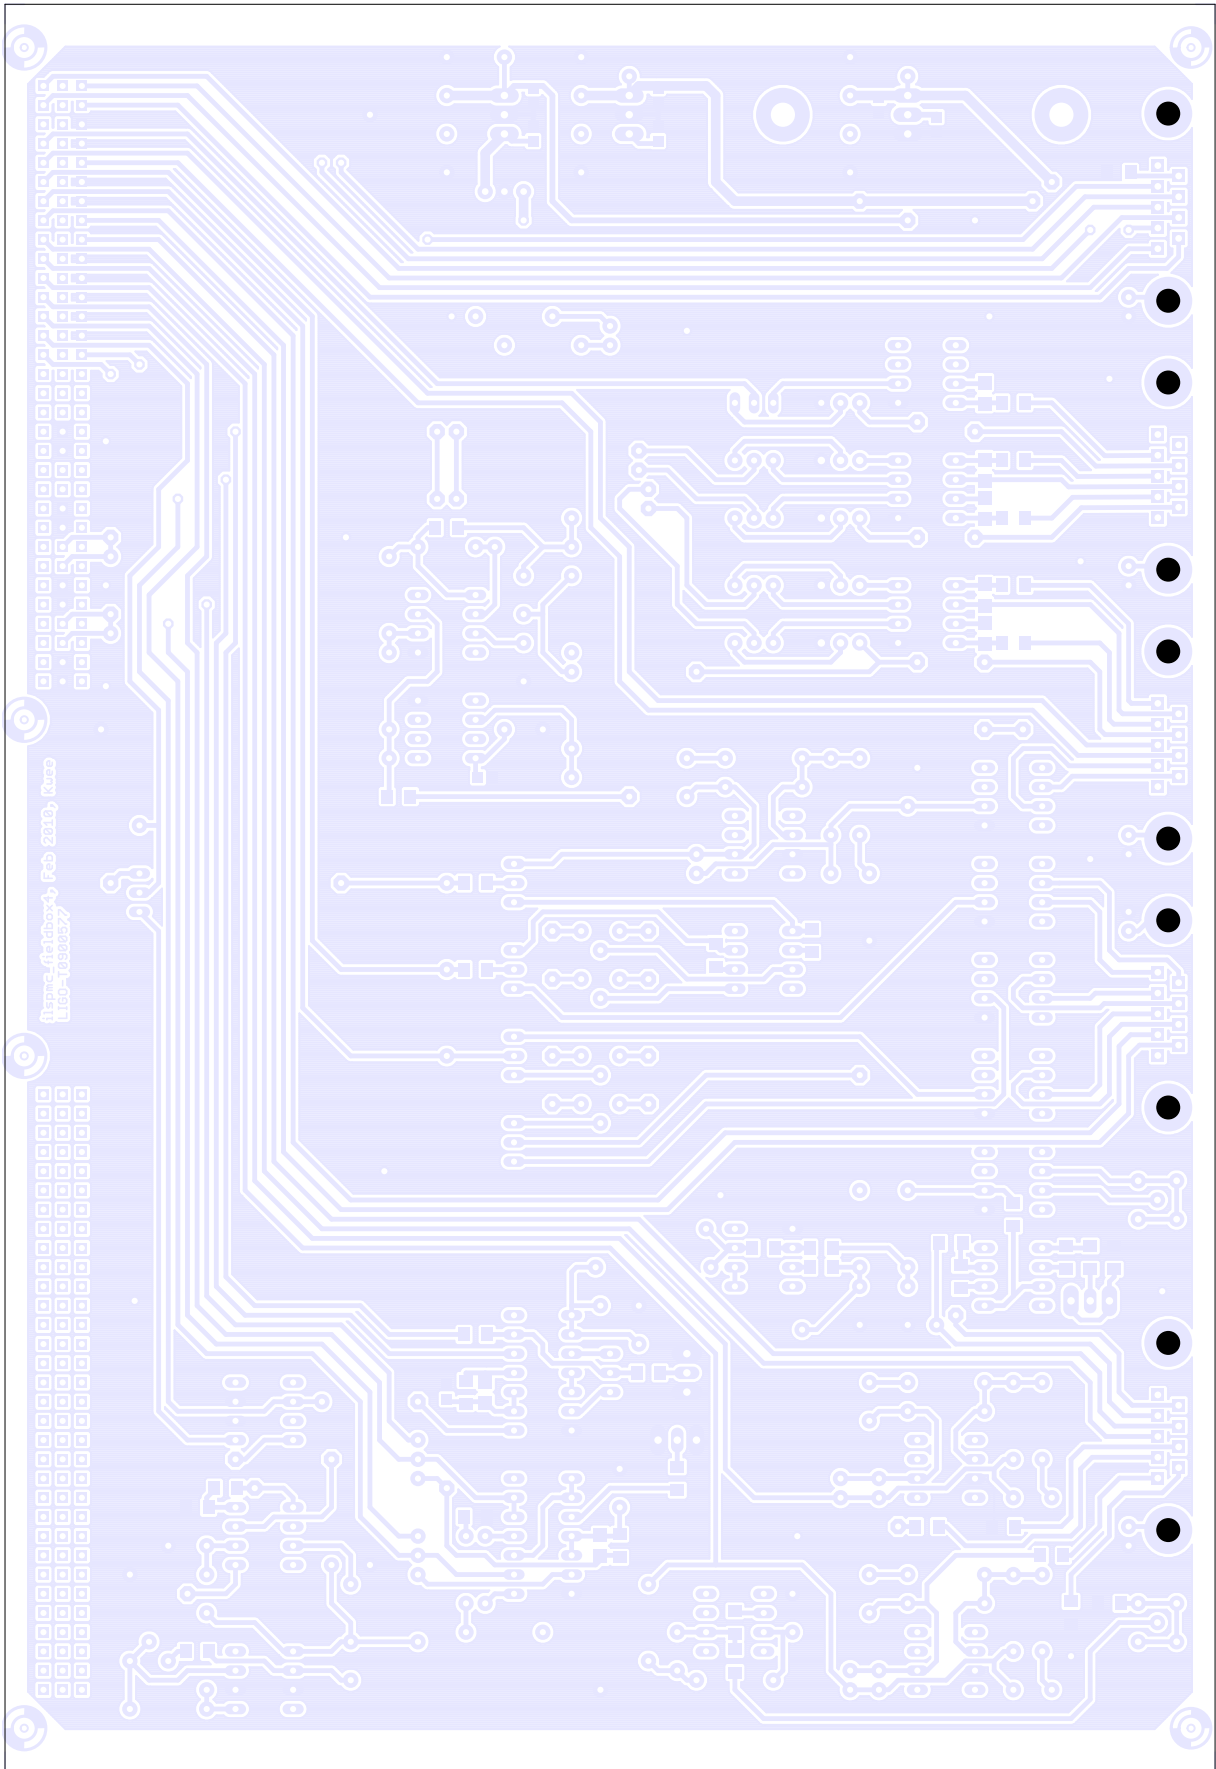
Board bottom view showing drills with 0.9 mm (0.035 in) diameter
